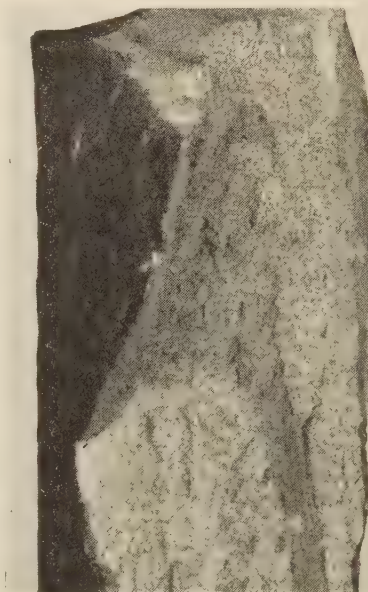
FRACTURE OF CENTRAL PLATE IN A THREE-PLY BOILER SHOWING A BRITTLE ZONE ADVANCING FROM BOTH SIDES WITH A DUCTILE ZONE IN BETWEEN
